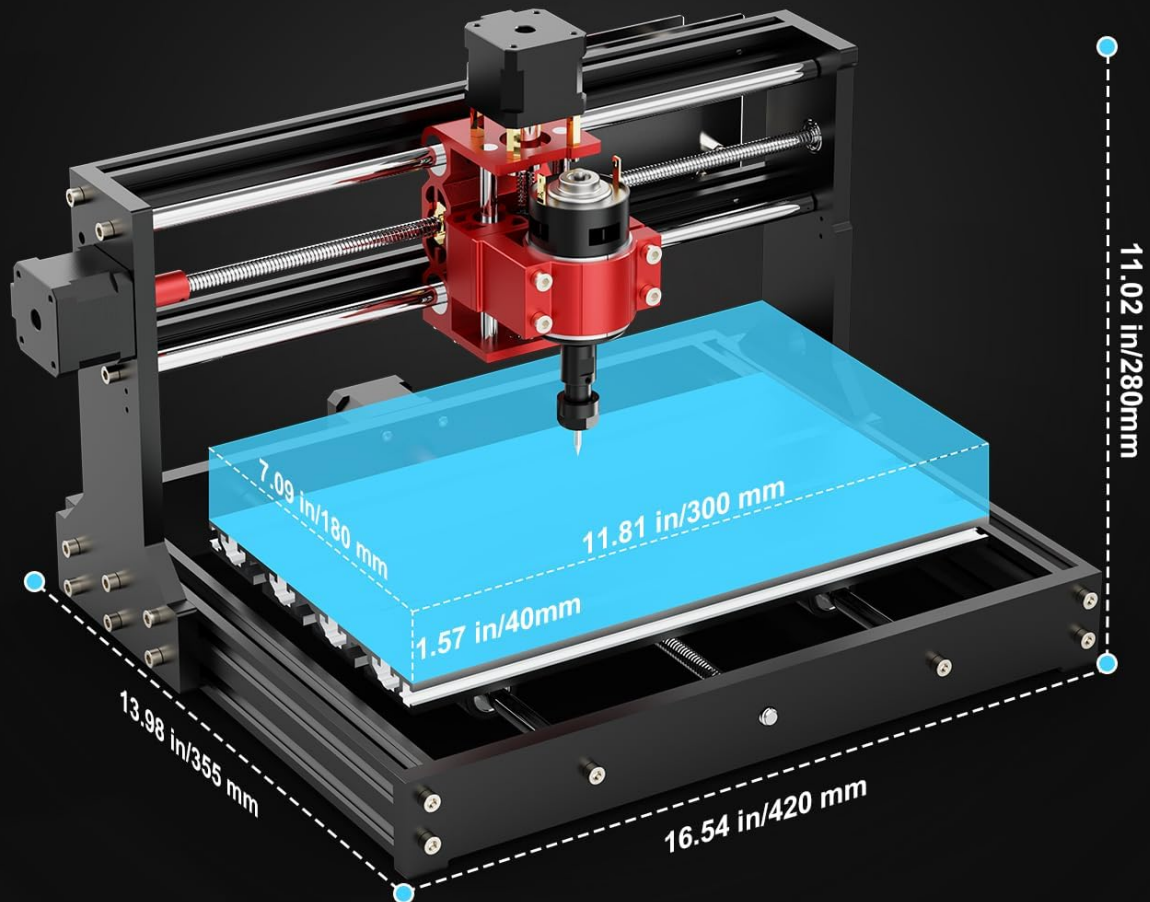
Diagram illustrating the dimensions of the Twotrees TTC 3018 Pro CNC Router Machine, highlighting its compact aluminum industrial structure.
